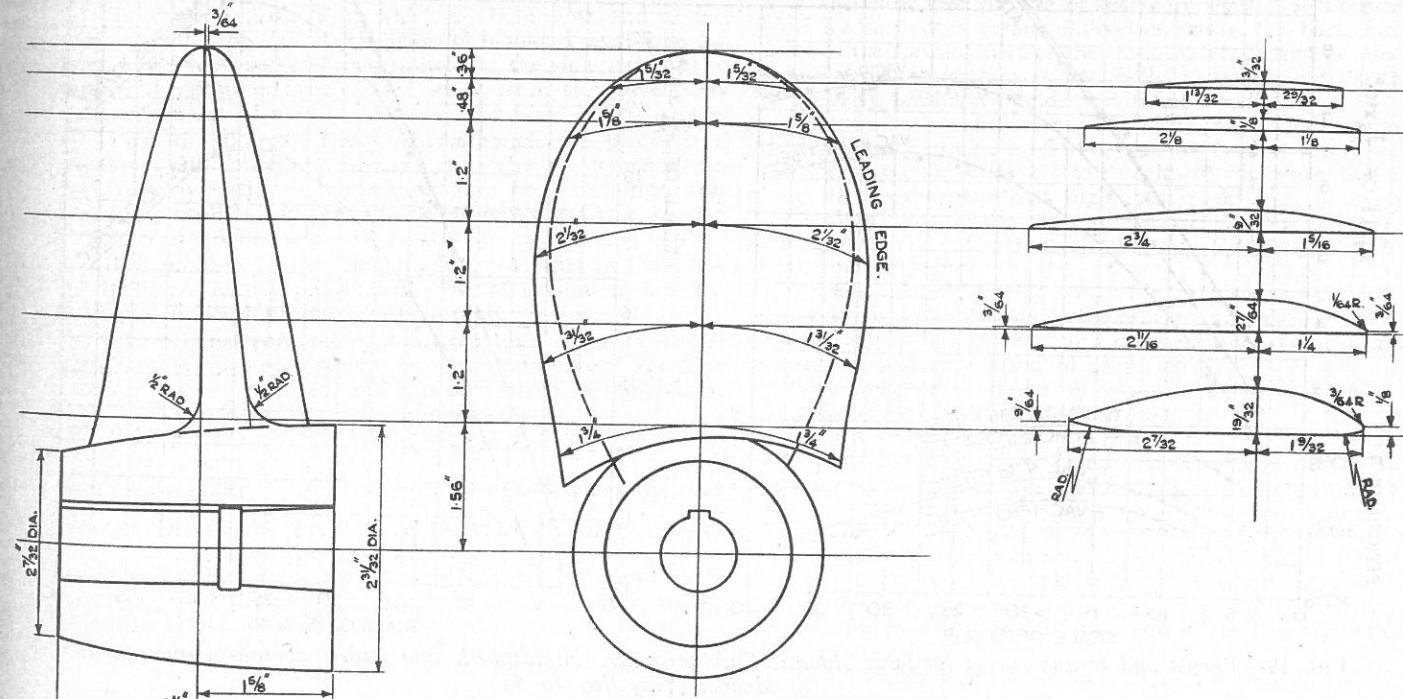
Drawing of liner propeller No. 50—airfoil sections
